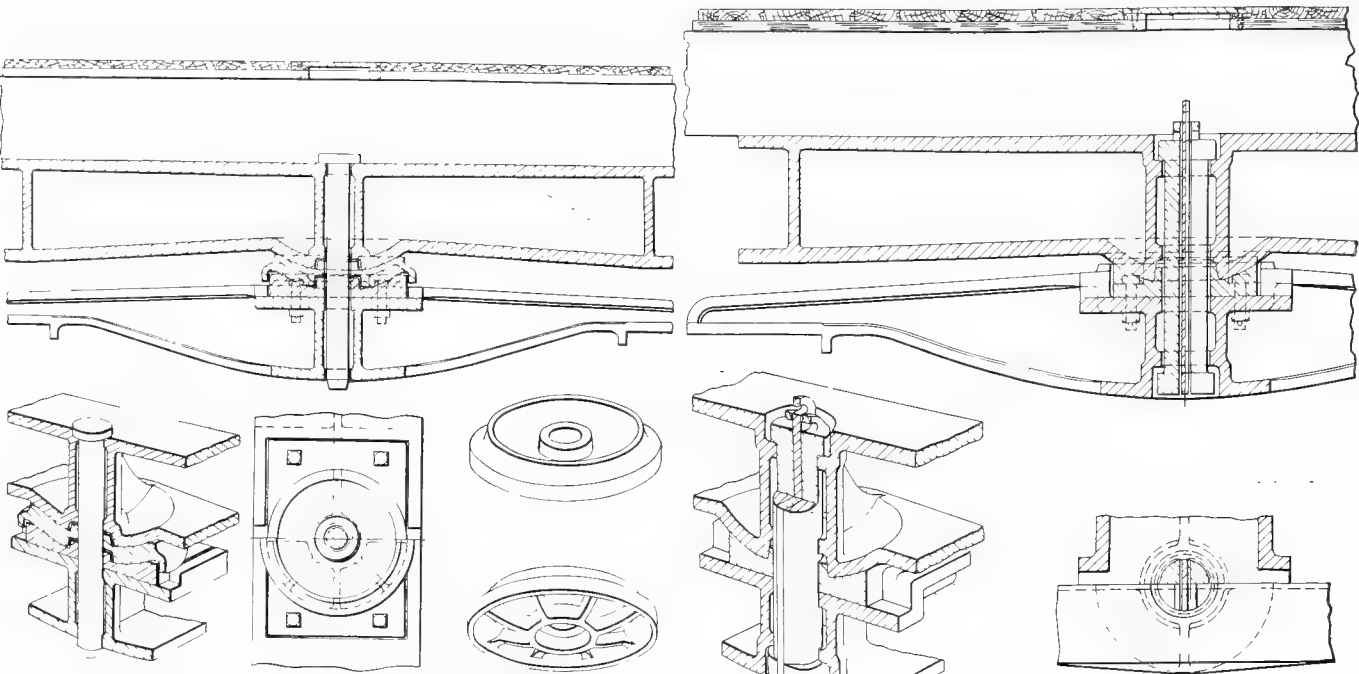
Miner Center Plate Shim as Applied to Passenger Equipment with Six-Wheel Trucks. W. H. Miner.
